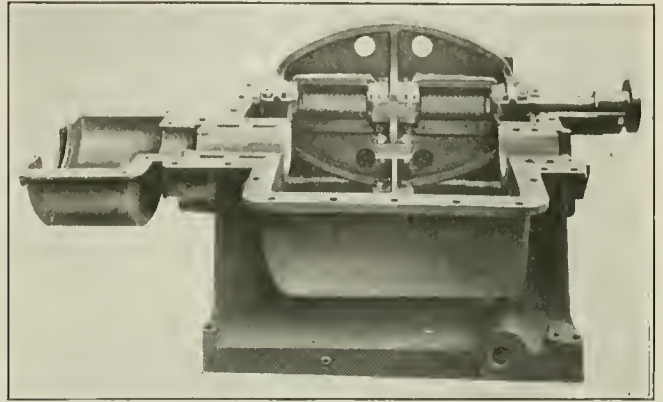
FLEXIBLE-FRAME GEAR SHOWING HOW THE THREE PINION BEARINGS ARE SUPPORTED
